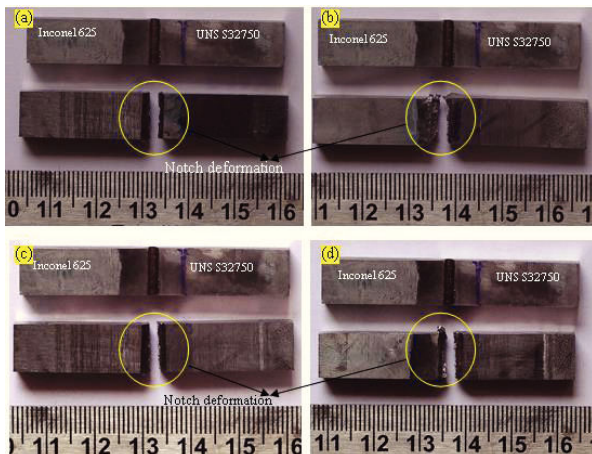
Impact tested samples of CCGTA weldments employing (a) ER2553 and (b) ERNiCrMo-4 filler and PCGTA weldments employing (c) ER2553 and (d) ERNiCrMo-4 filler respectively.
